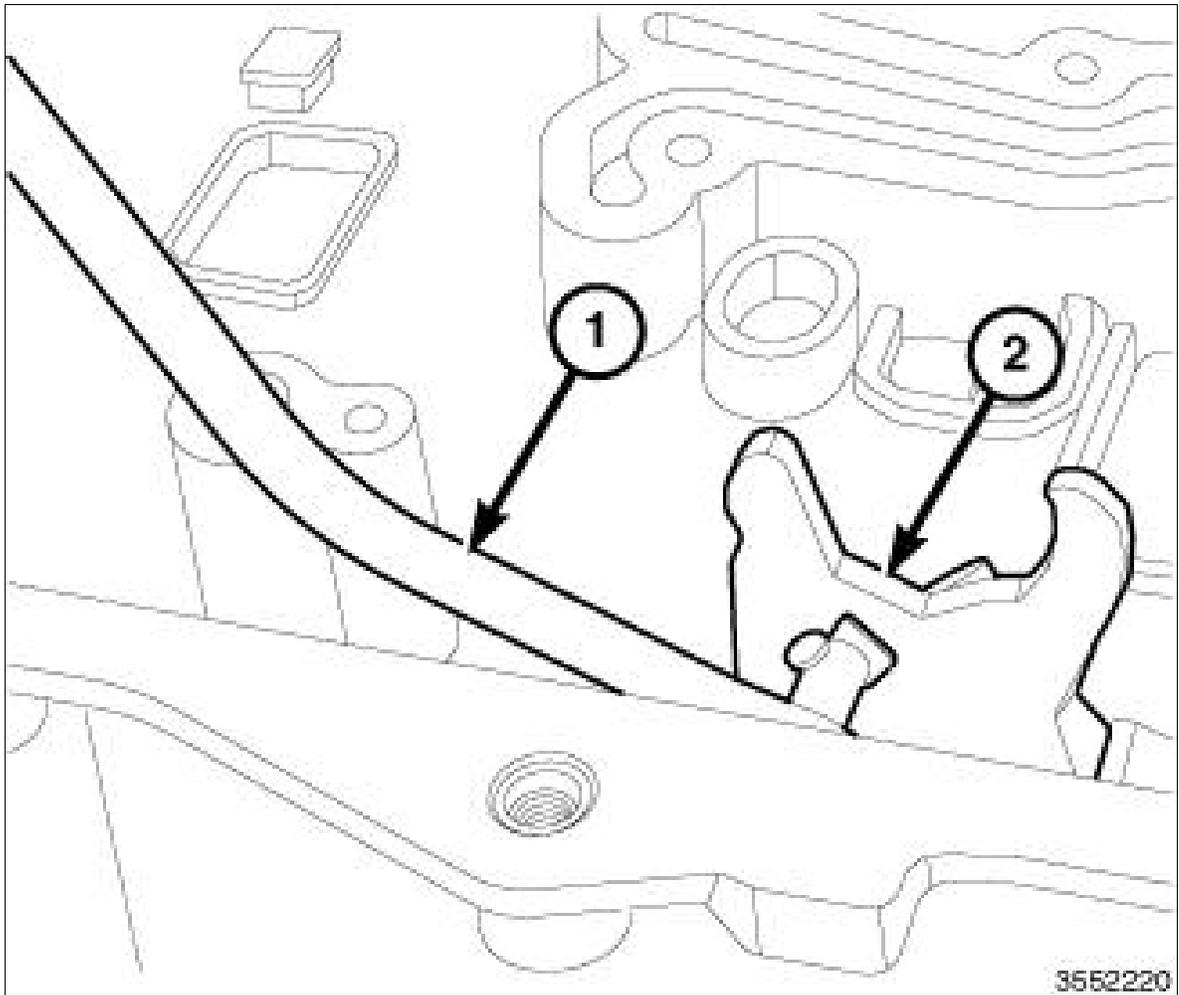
Selector Shaft, Suitable Pin Punch, Spring & Fork
